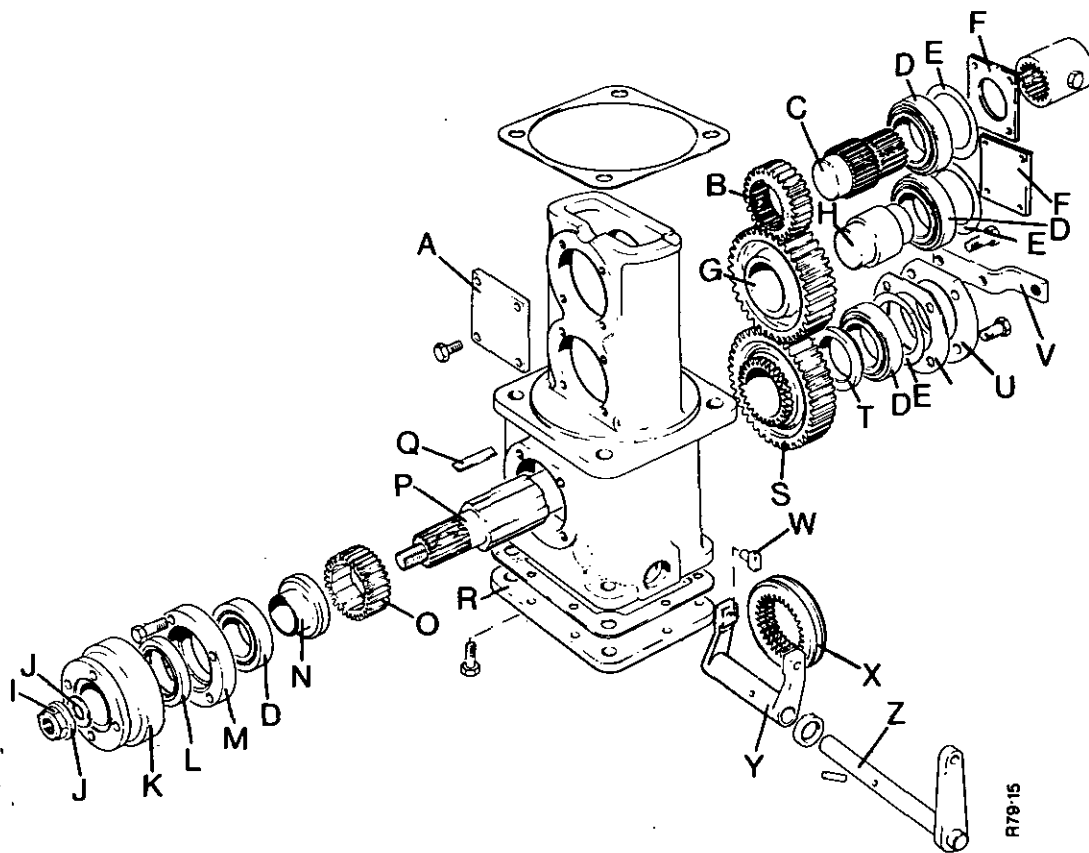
TRANSFER GEARBOX ASSEMBLY
